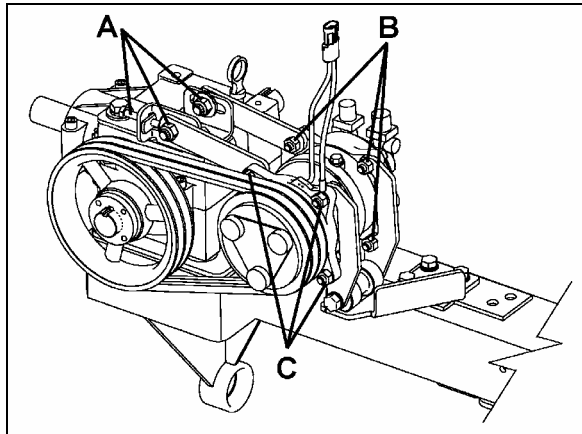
COMPRESSOR REMOVAL OR INSTALLATION 22285
